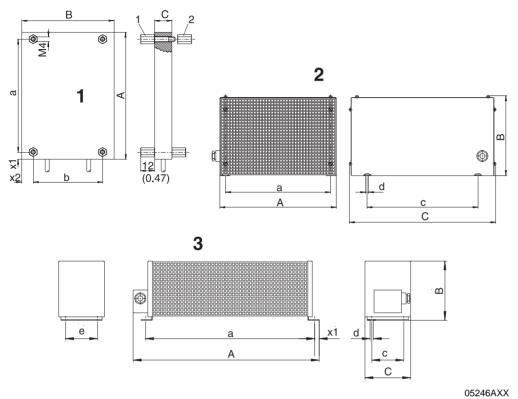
Dimensions of BW braking resistors, 1 flat-type / 2 grid resistor / 3wire resistor
